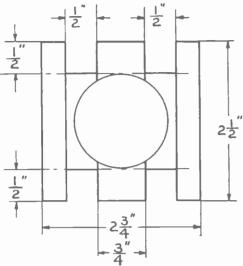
FIG. I. MOUNTING BLOCK OF GALVANO-METER
